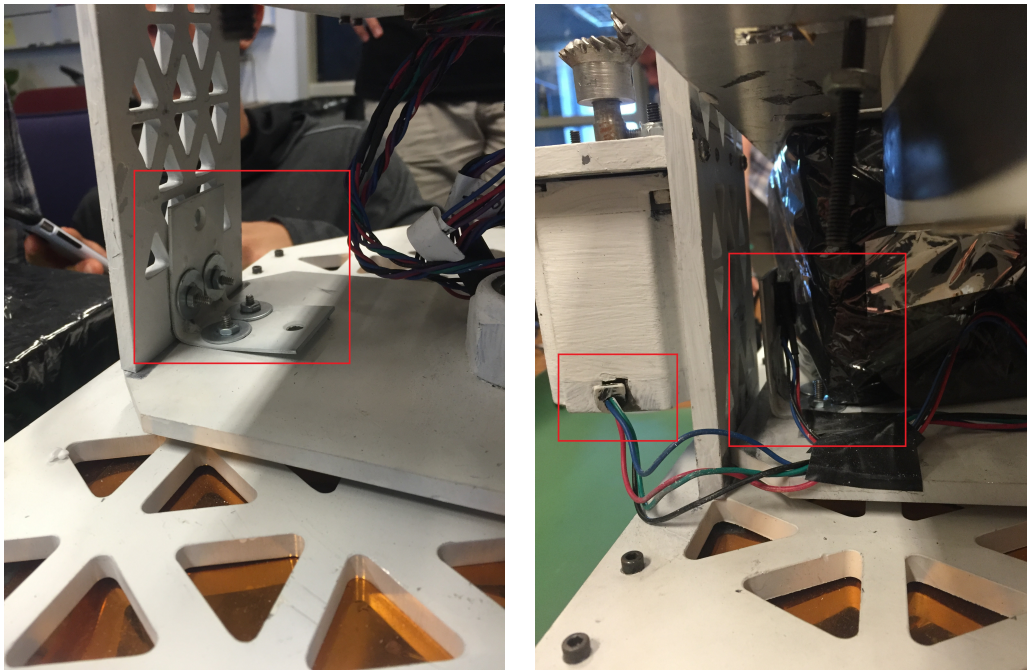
Bent L-bracket on Upper Housing Supports and Damaged Motor Wire Cover
